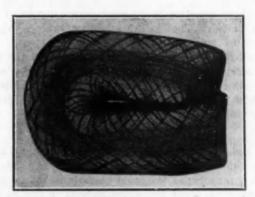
PIECE OF BOILER PLATE, BENT FLAT UPON ITSELF COLD
